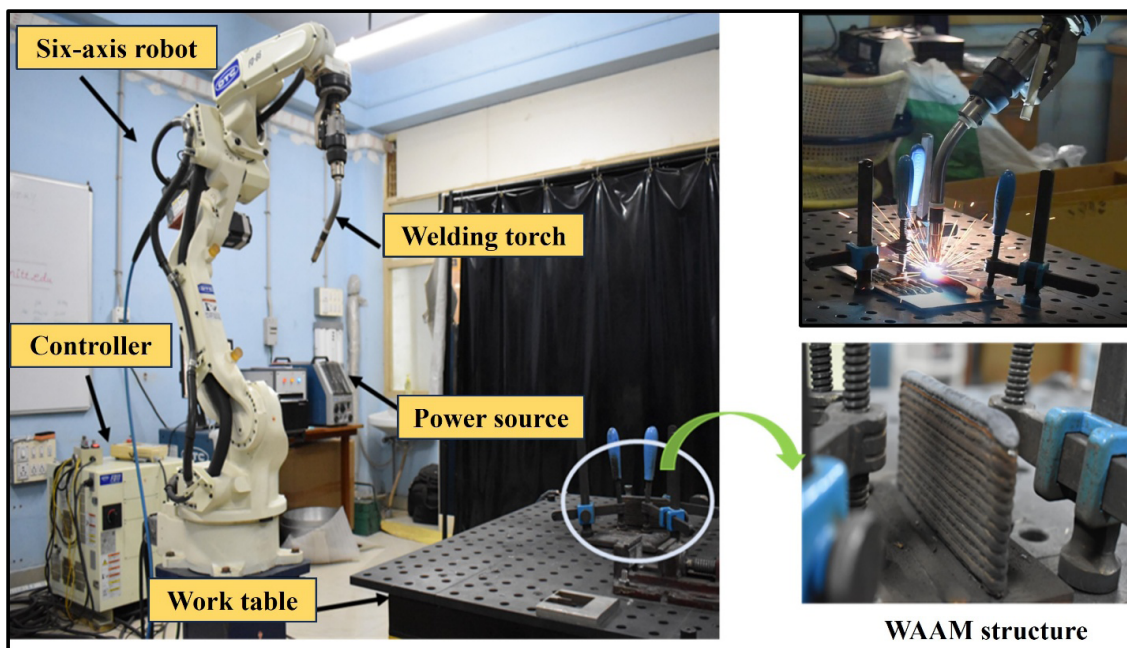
Gas metal arc welding (GMAW)-based wire arc additive manufacturing (WAAM) setup for developing a plate using UNS S32707 hyper-duplex stainless steel filler wire
